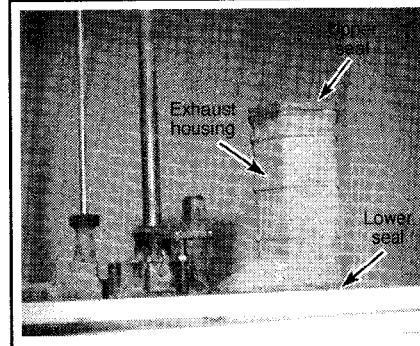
the inner exhaust housing must be properly resealed during installation
